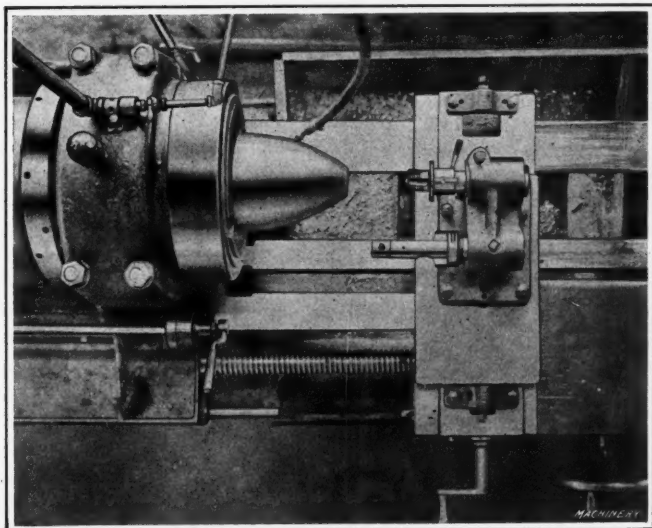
Close View of Tools on Machine for boring, reaming, facing and tapping Nose of Shell
